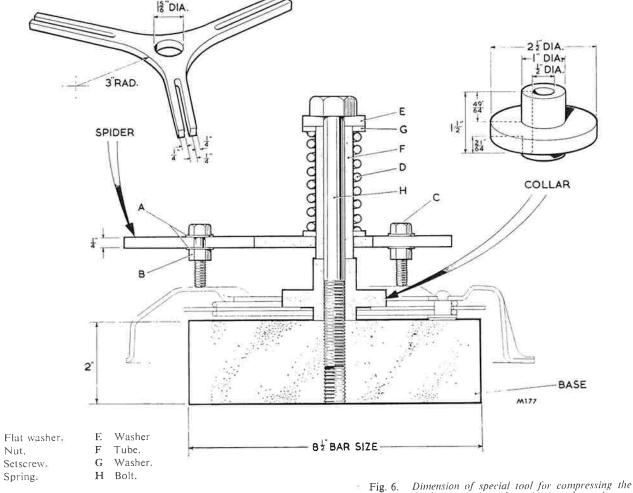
Dimension of special tool for compressing the diaphragm spring when riveting the spring to cover pressing.
